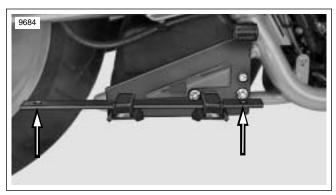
Exhaust Support Fastener Locations (exhaust system removed)
